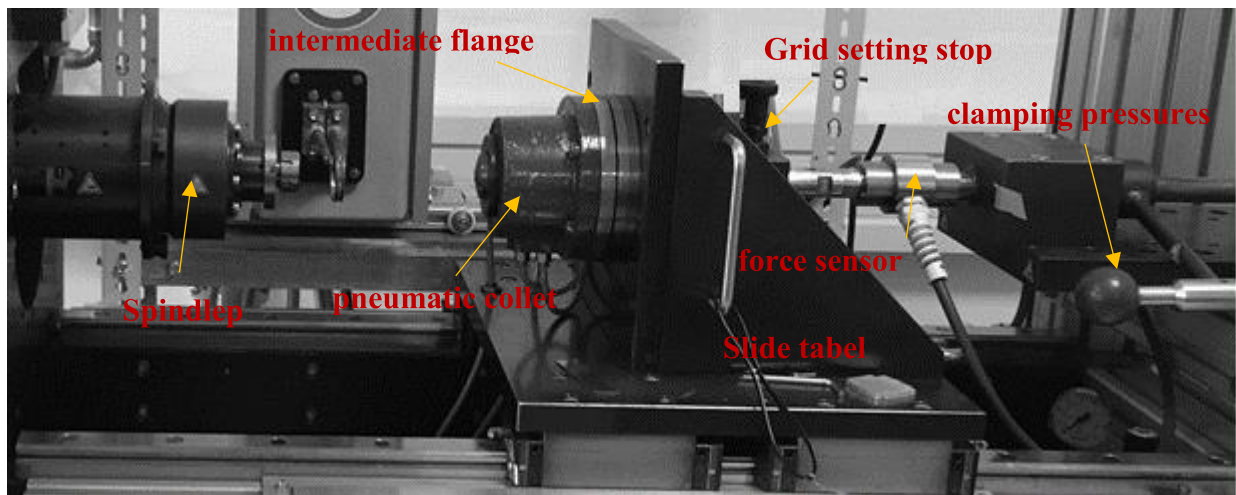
The used rotary friction welding machine RSM 200 [116]
